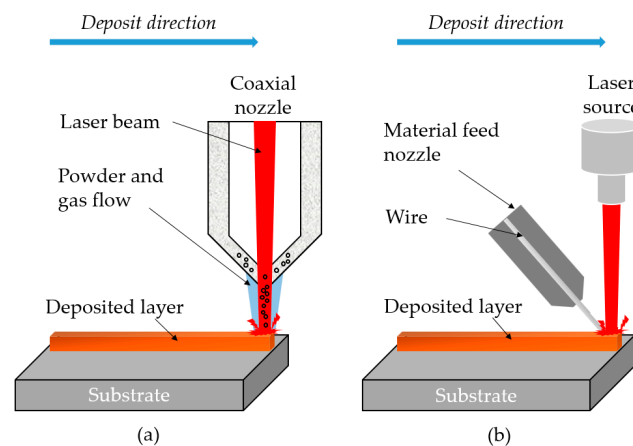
Schematic diagram of the DED and welding processes using (a) a coaxial nozzle and (b) a material feed nozzle.
